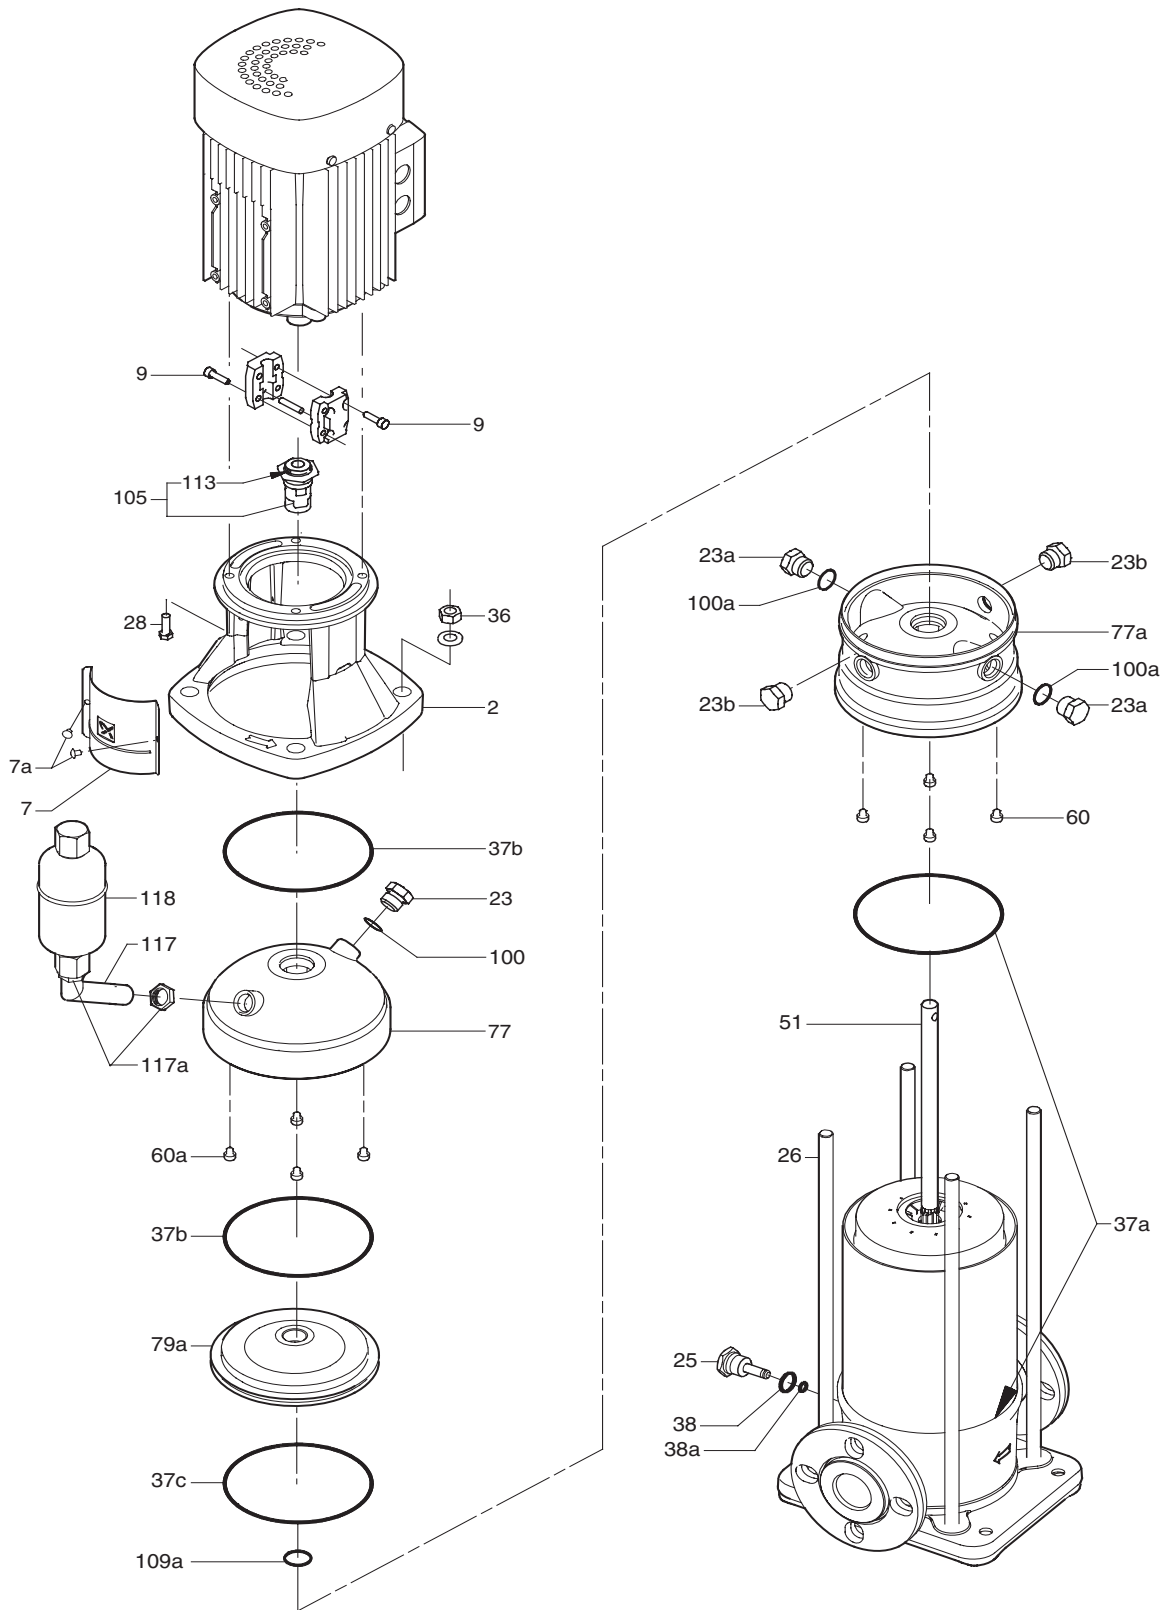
Exploded view, CRI, CRN 10, 15, 20
